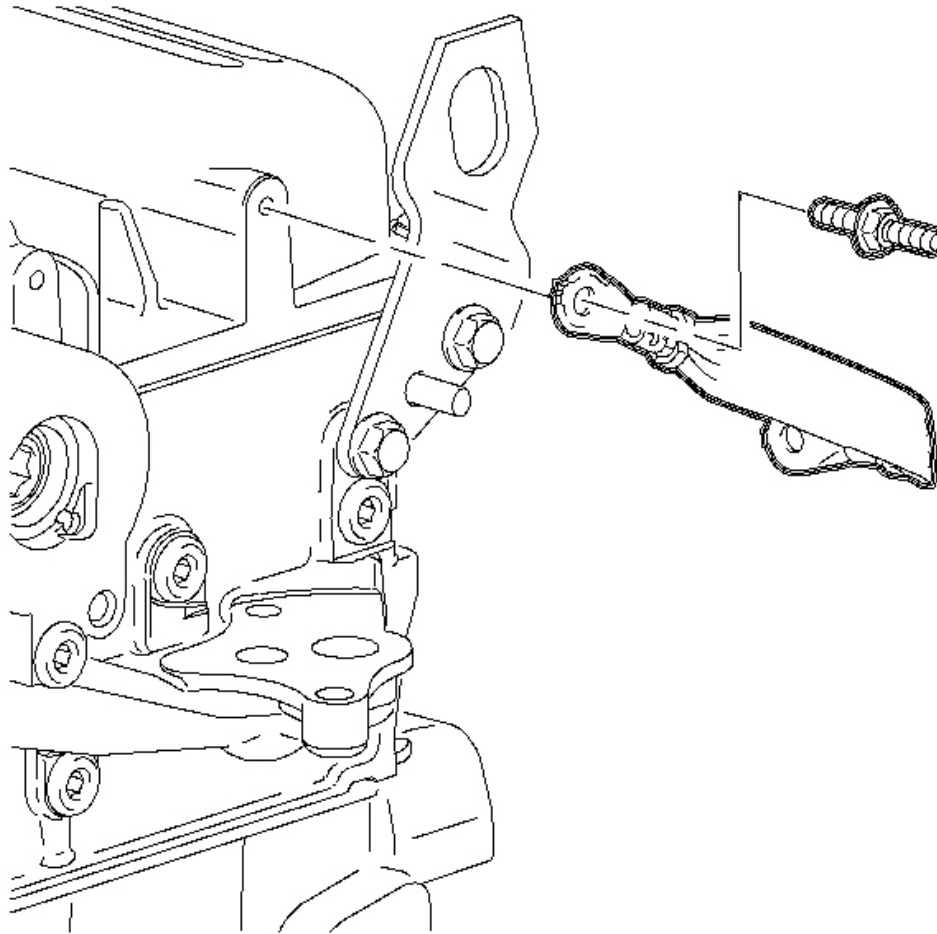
Disconnecting/Connecting Ground Strap On The Camshaft Cover Assembly
